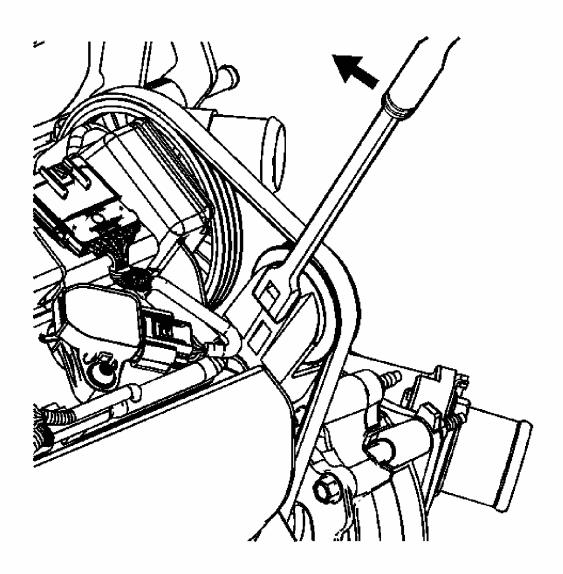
Rotating Water Pump Drive Belt Tensioner Courtesy of GENERAL MOTORS CORP.
